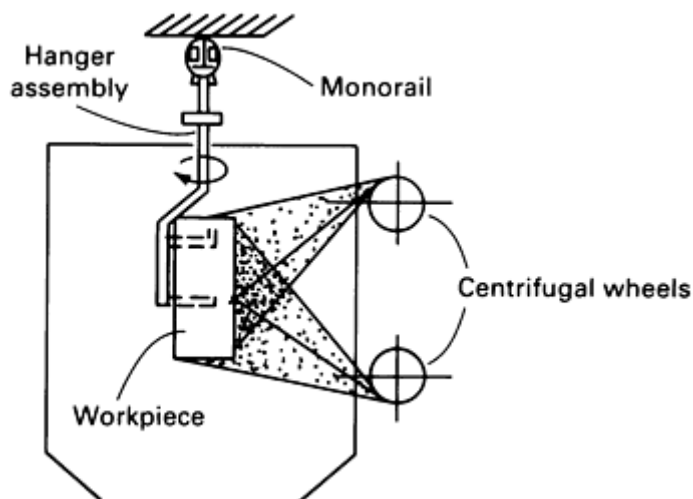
Front view of a typical rotating hanger blast cleaning assembly. The workpiece is rotated 360° as it is held in position on the monorail track to provide full coverage by the blast pattern produced by the centrifugal wheels.
